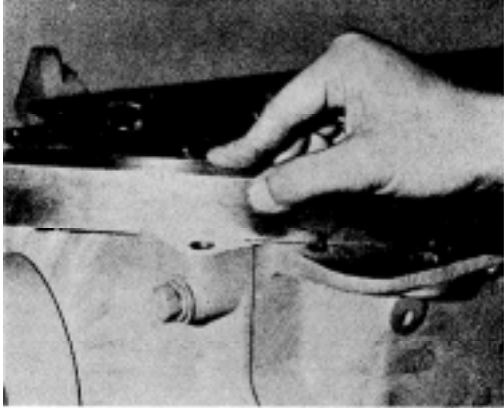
, (N114134). Checking gear case cover to block alignment
